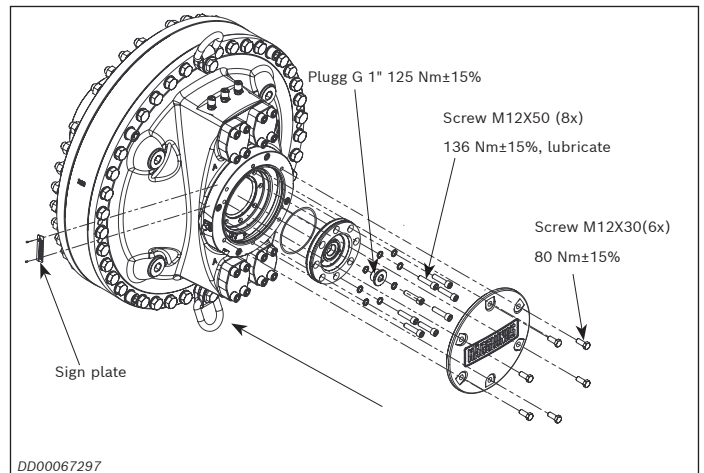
SPDC magnetized bearing holder, sign plate and cover
